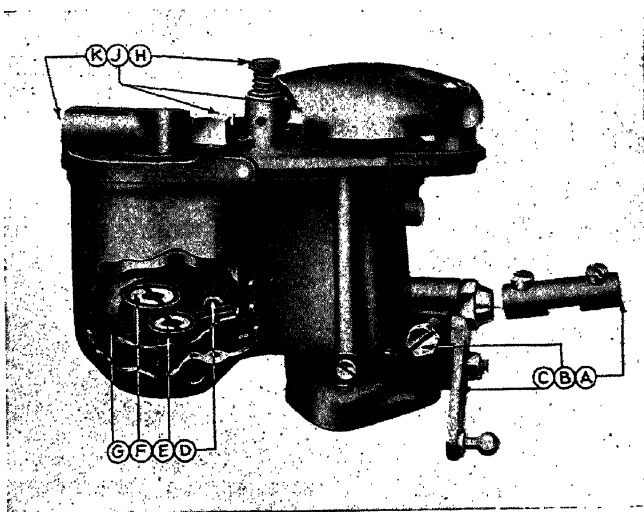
The Ford 8 and 10 h.p. Carburettor.
